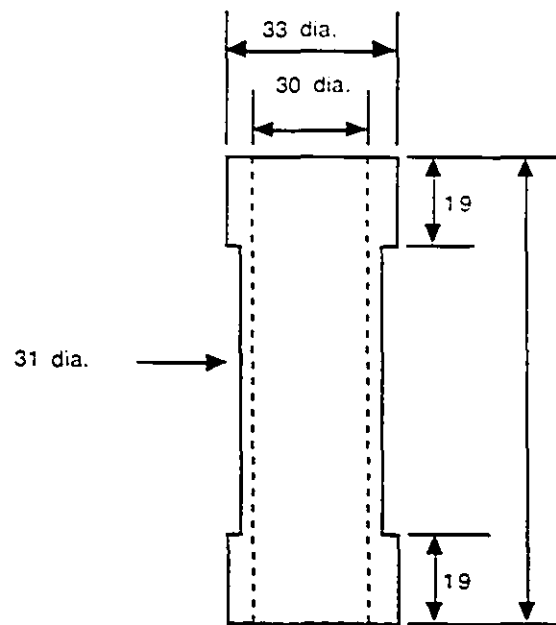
Head Tube Cylinder (all dimensions in mm)
